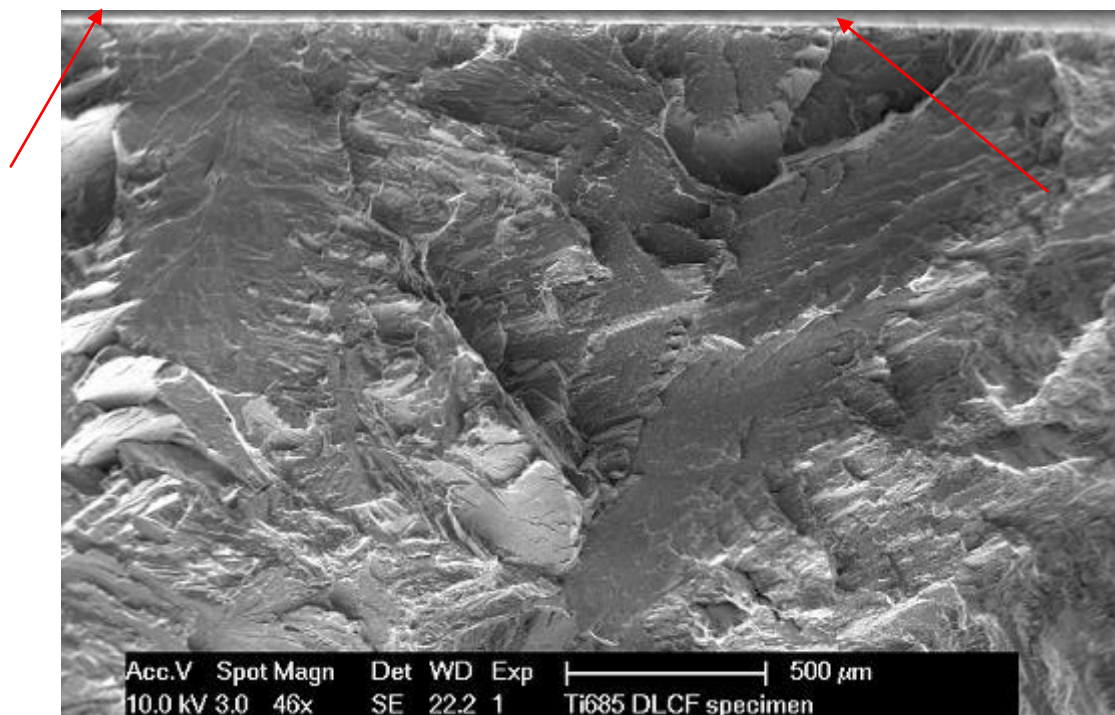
Ti685 cold dwell fatigue specimen with multiple fracture surface facets. Facet A fractography at the sectioned surface (Loading axis is normal direction)
